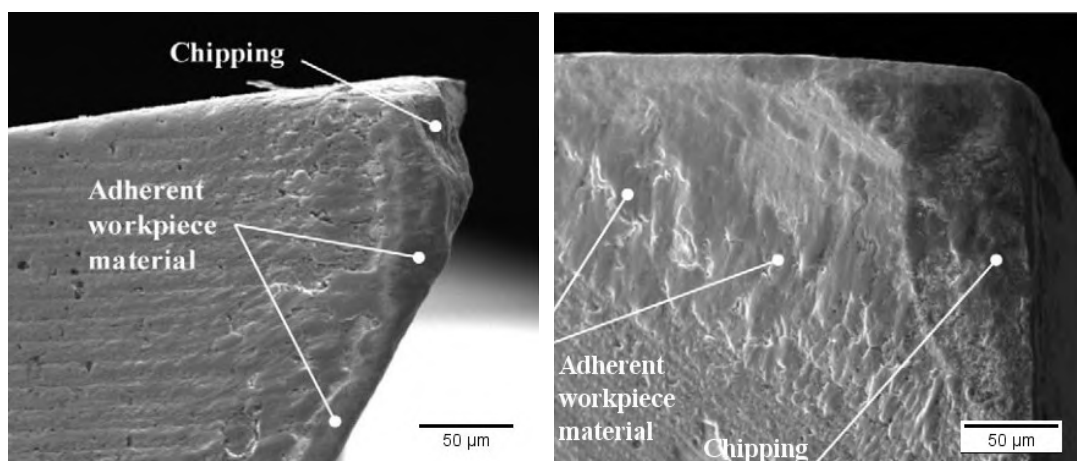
Images of adherent workpiece material on the tool cutting edge, after 40 min of milling (adapted from [108]).
